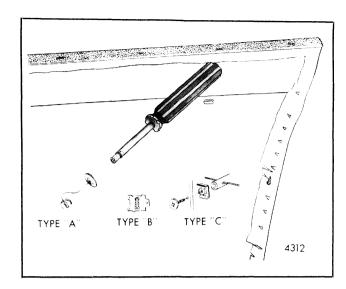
Door Trim Pad Molding and Applique Removal
